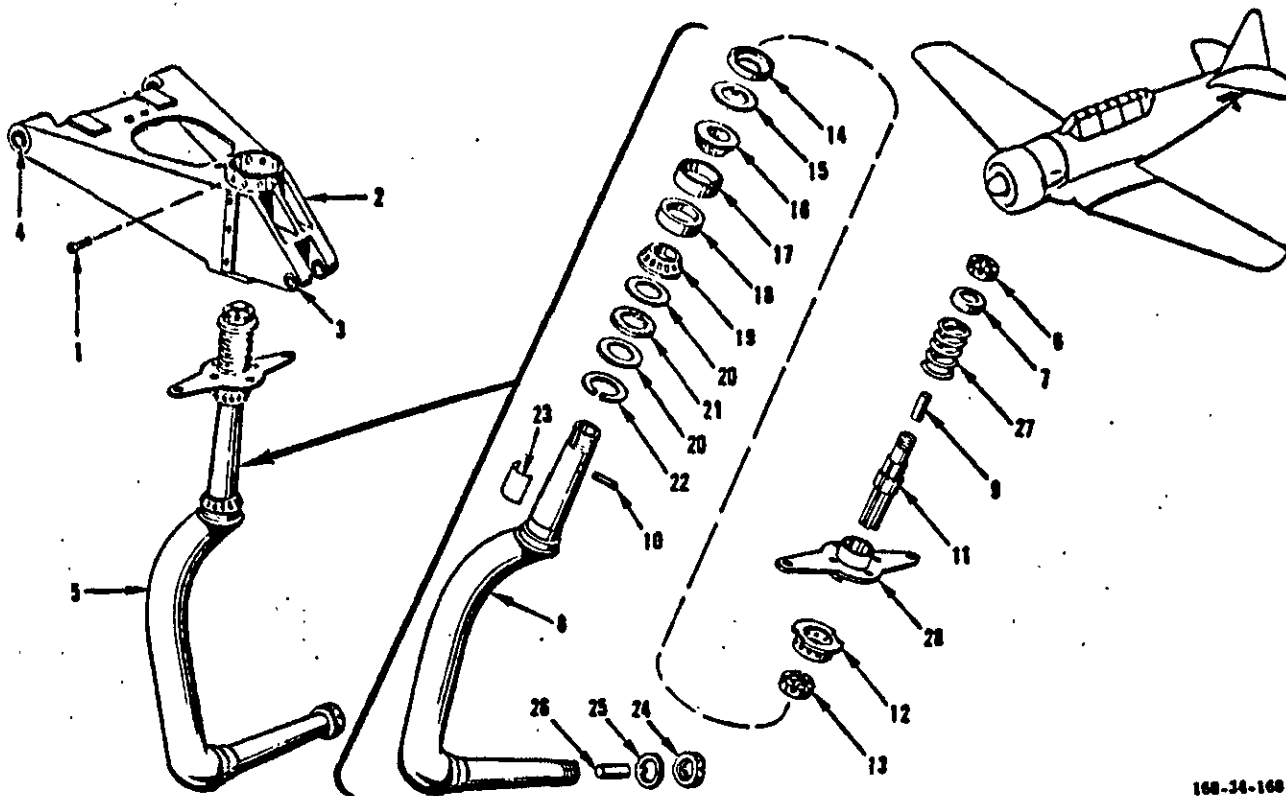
AUXILIARY ALIGHTING GEAR
